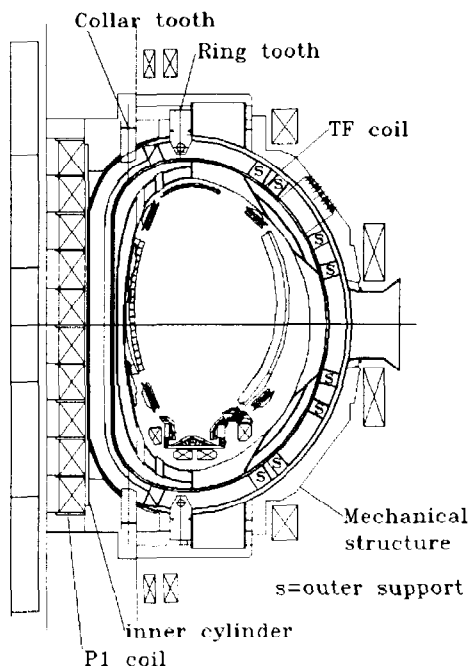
The JET machine showing toroidal and poloidal coils and support positions for out-of-plane forces
